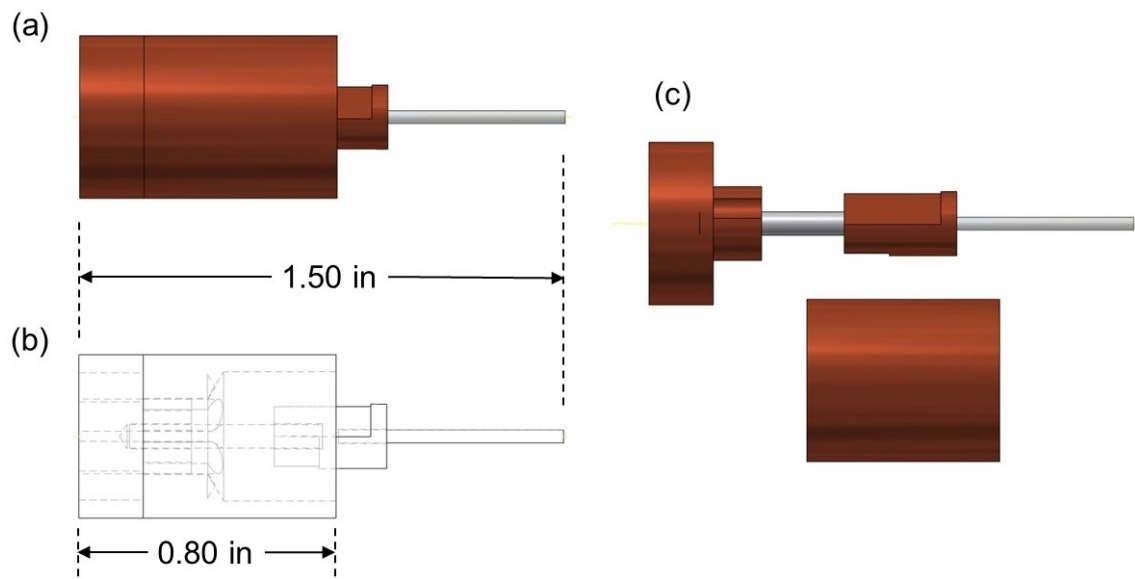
Autodesk inventor schematics of the ^3He perpendicular sample holder. (a) Side view and (b) side view with visible edges. (c) Side view with the outer shell removed. From left to right: the base, the macor rod, the thermometer/heater stage and the sapphire rod where the sample is mounted. The outer diameter of the shell is 0.506 in, the length of the base and the shell is 0.80 in and the total length from the base to the sapphire tip is ~ 1.50 in.
